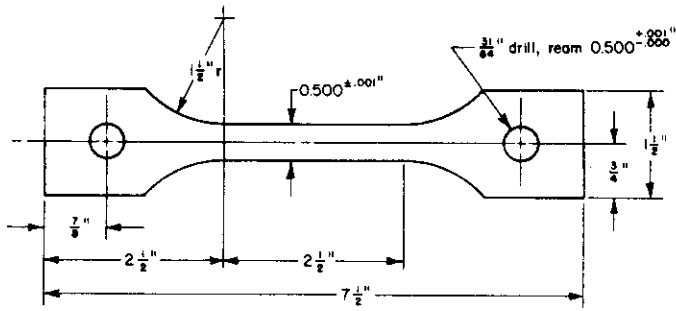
SHEET AND THIN-PLATE TENSILE SPECIMEN
